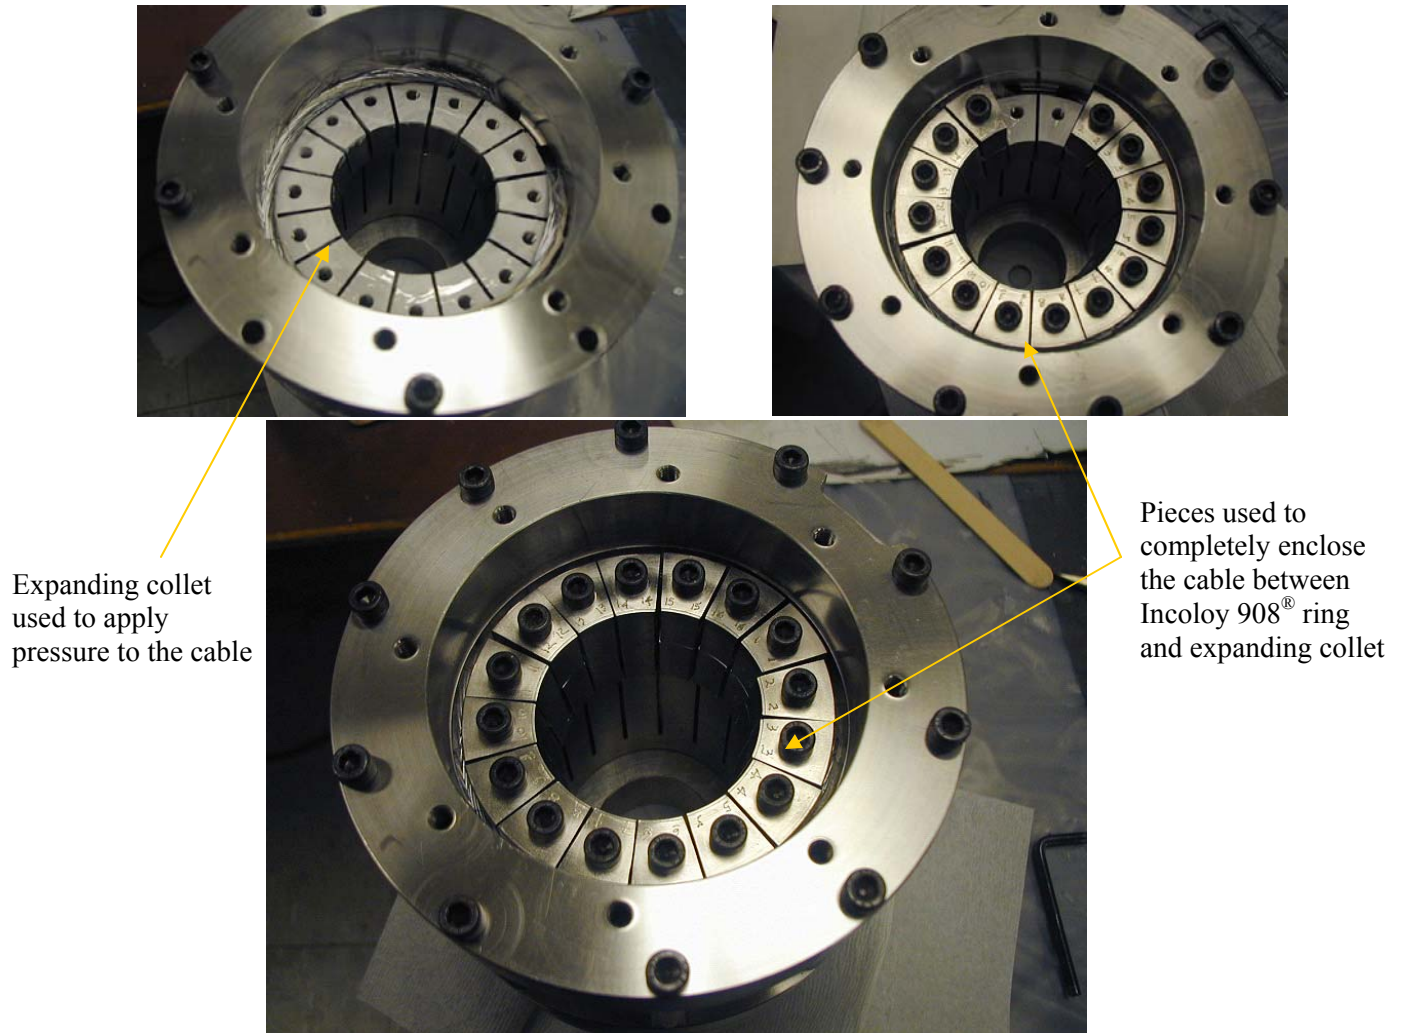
Mounting of stainless steel “fingers” to enclose the cable between Incoloy 908<sup>®</sup> ring and expanding collet.
